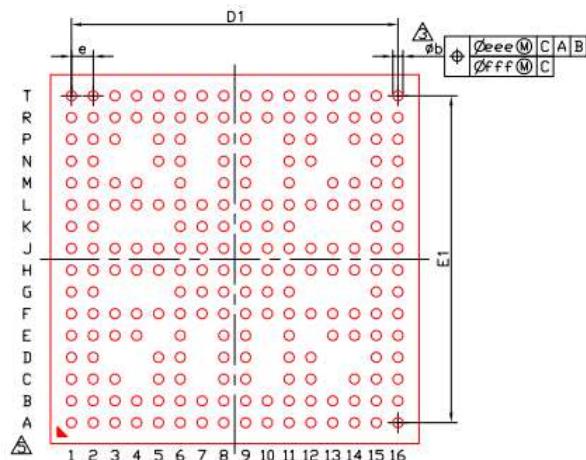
RK618 TFBGA(HF) Package Bottom View
